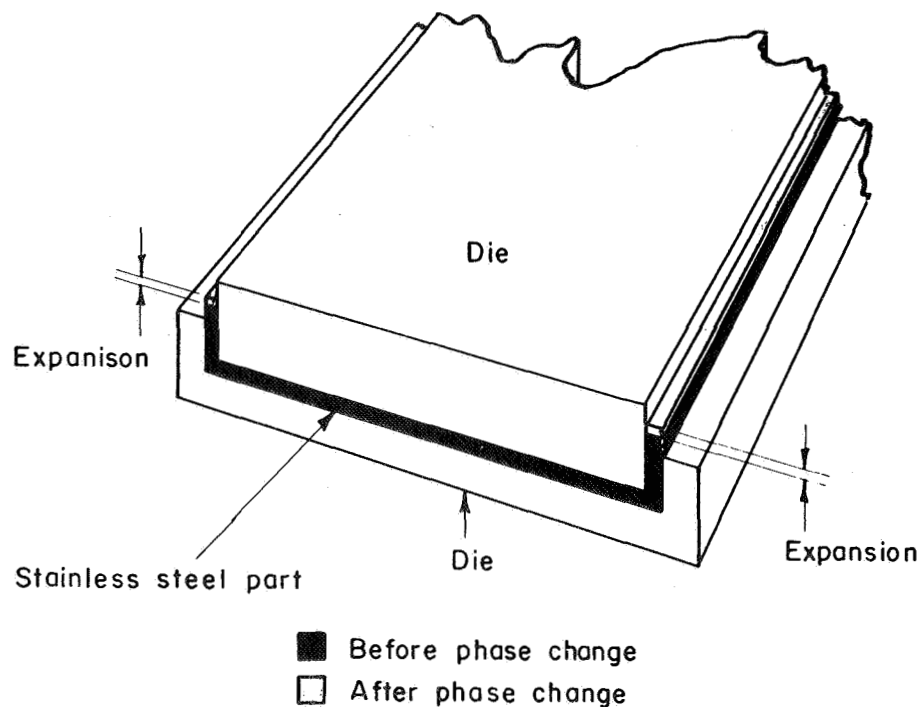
SKETCH OF FLANGED STAINLESS STEEL PART IN DIE FOR SUBZERO FORMING
